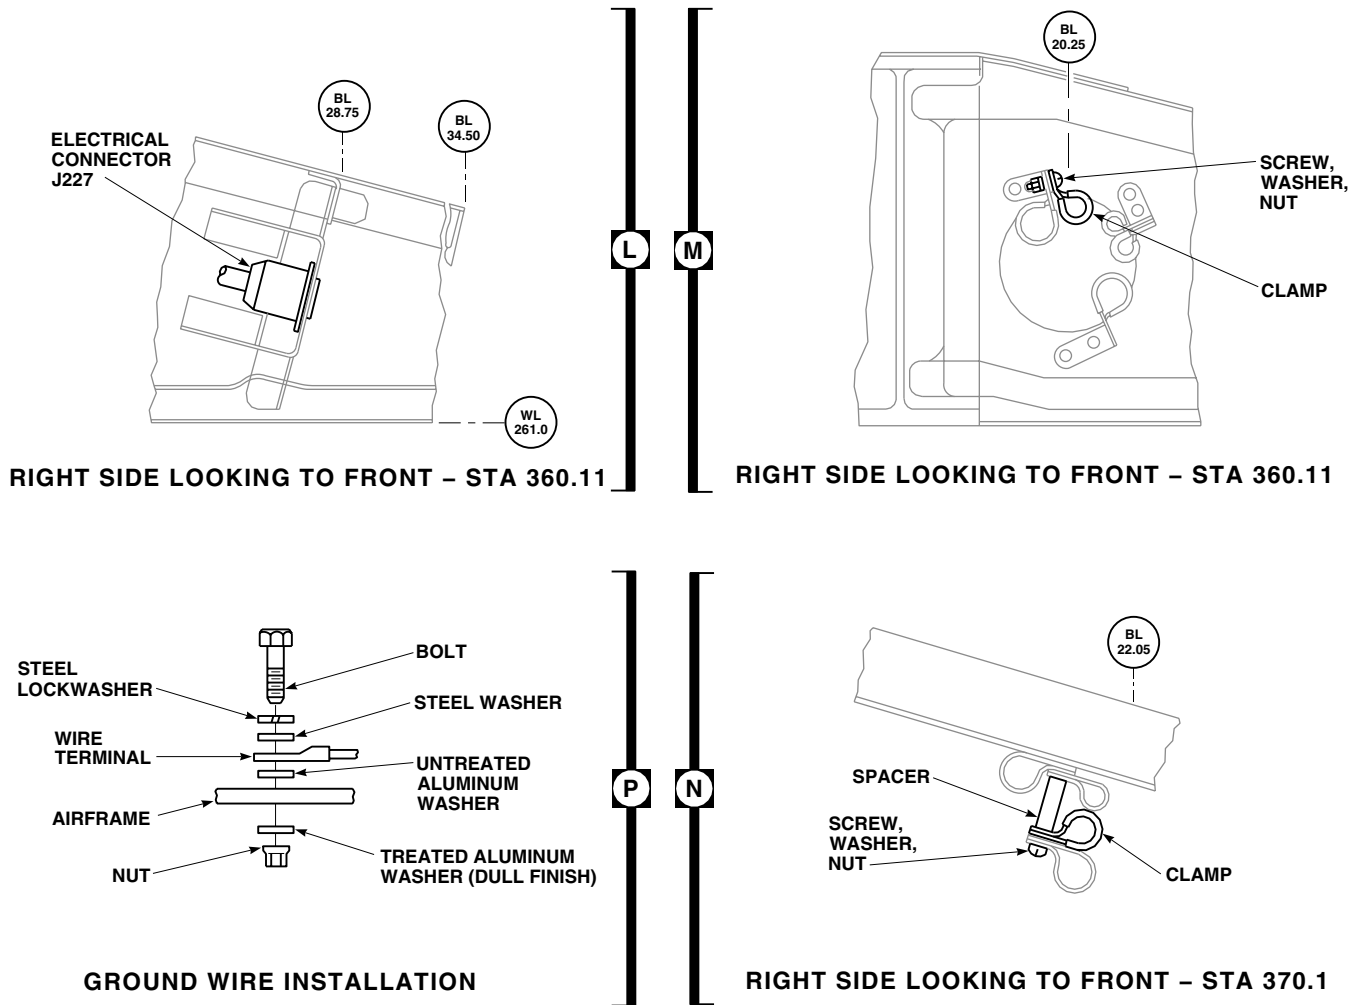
Remove/Install Rescue Hoist Harness. (Sheet 3 of 3)
